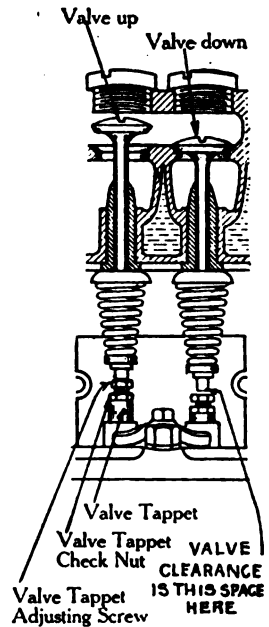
Type of valves on side of "L" head engine—clearance is adjusted as shown in illustration. (Hudson six.)
